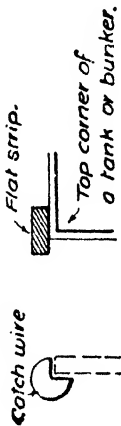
Method of Beading Edges of Cabs, Tanks, etc., and Making Coal Rails.
